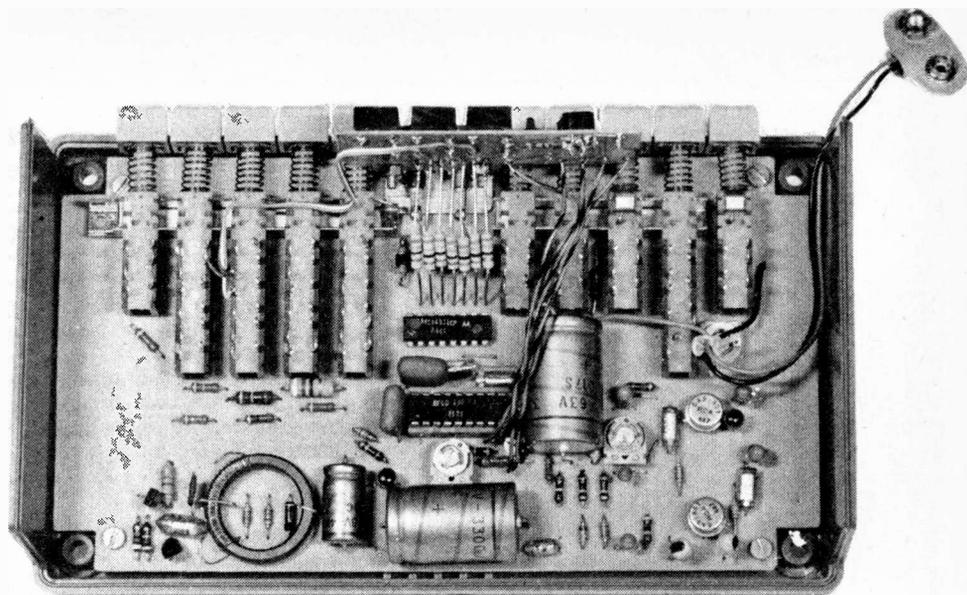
Main p.c.b. Mounting spacers may be necessary, and may be soldered to the copper cladding
